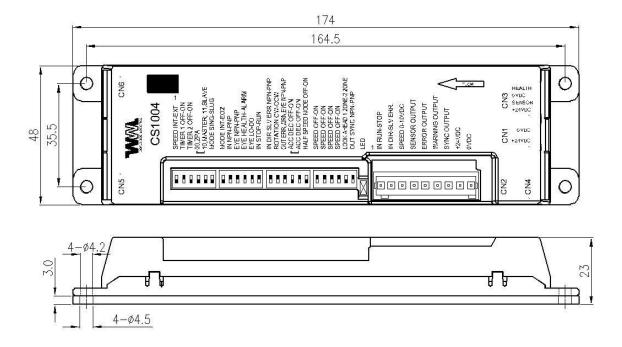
The Location of Four Mounting Holes (unit in "mm")
